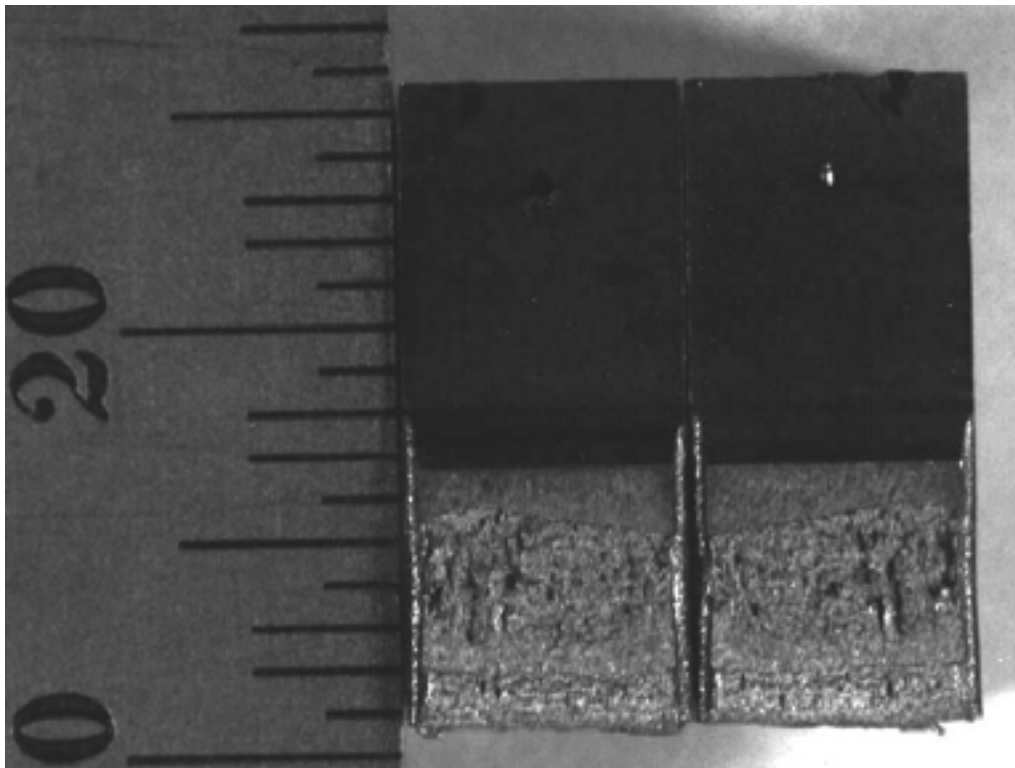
Fracture surface of specimen 184-40 tested at 288°C
